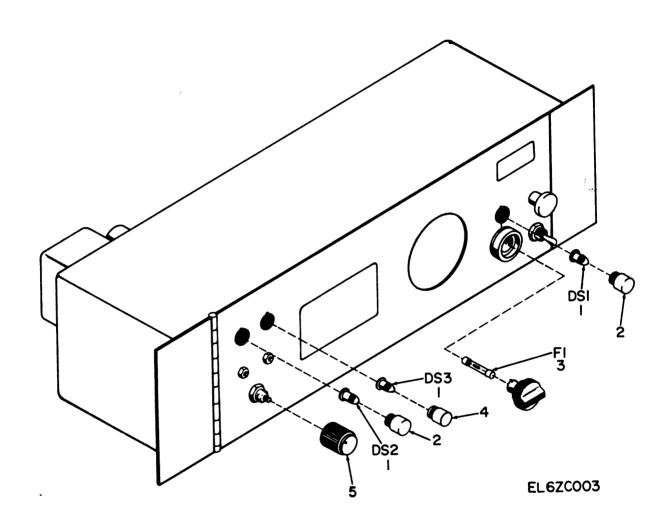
Front Panel Assembly (Sheet 1 of 2).
